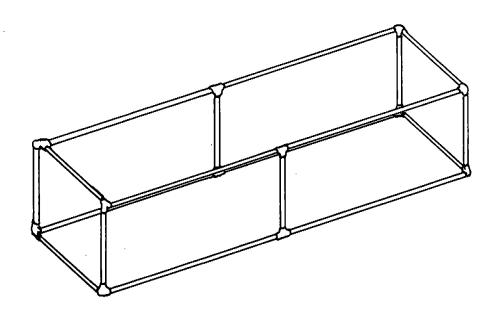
COMPARTMENT FRAME ASSEMBLY
